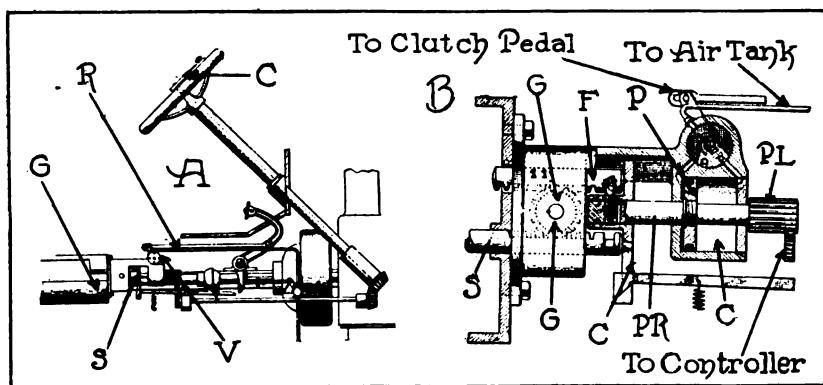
Gray Pneumatic Gearshift: A. Showing General Arrangement; B. Detailed Section of Shifting Mechanism and Components.
